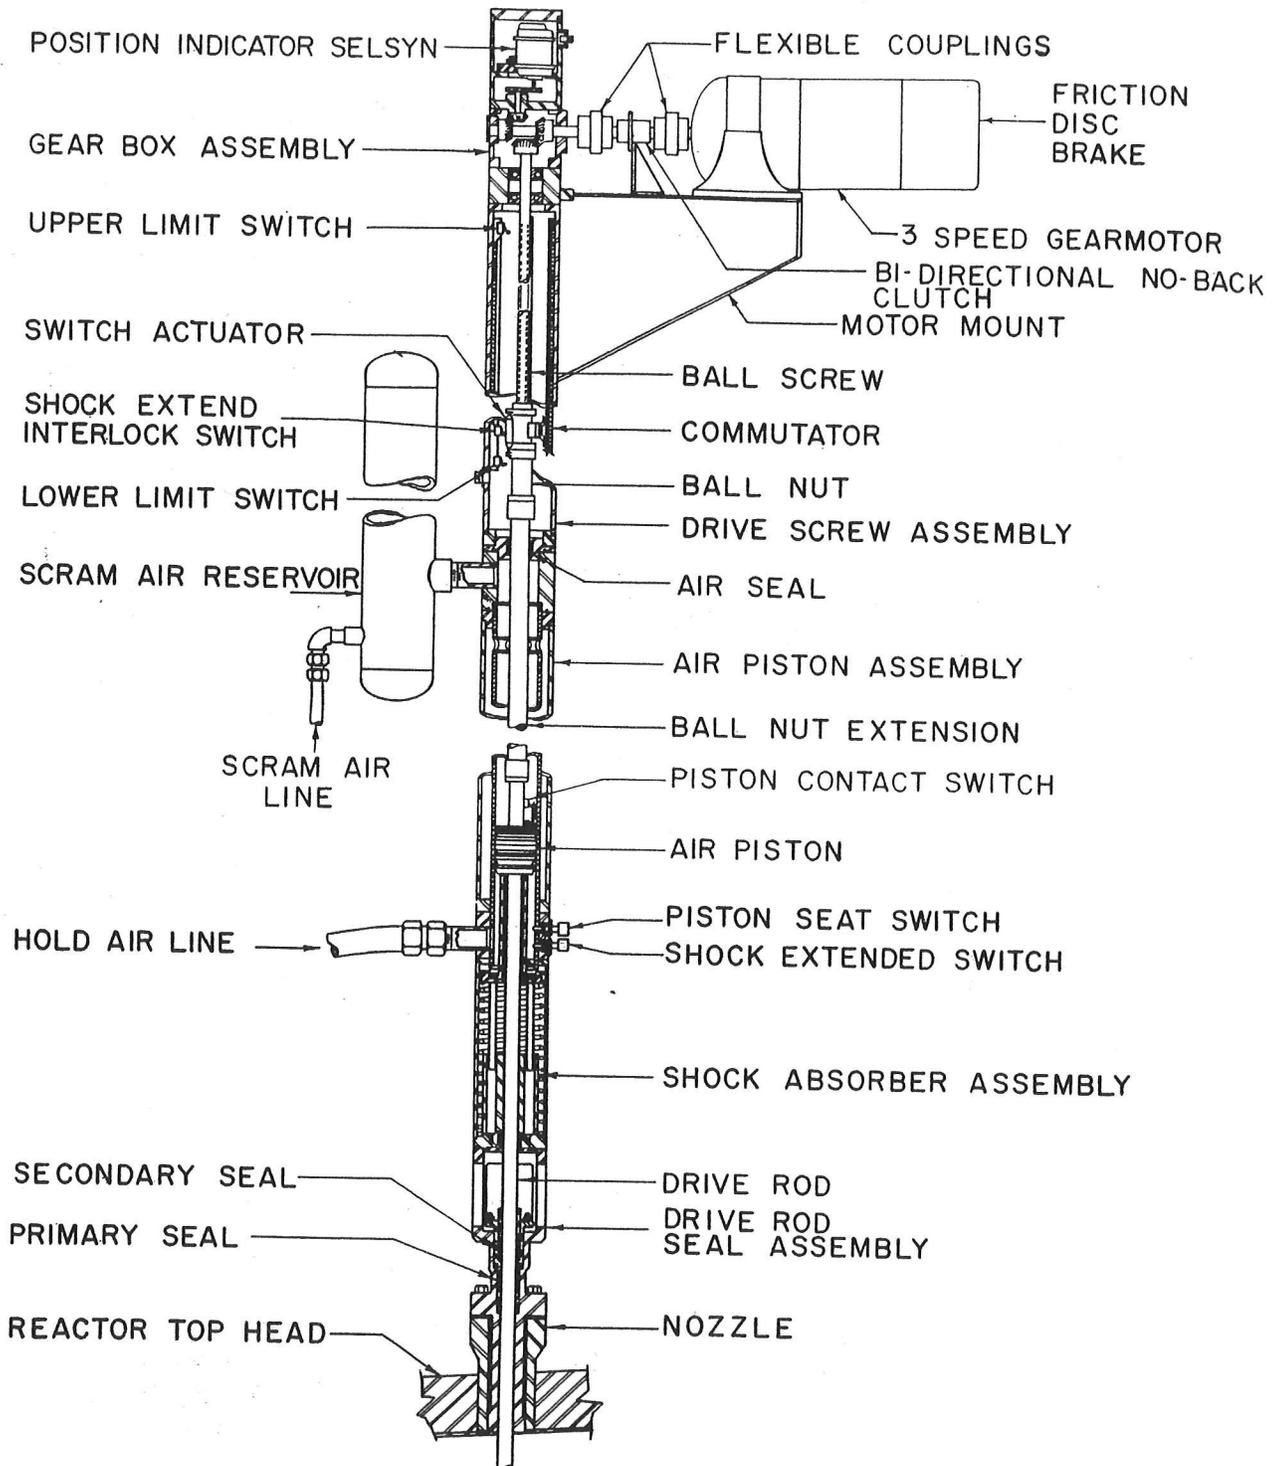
Schematic drawing of SPERT-III control rod drive assembly. Compare with HAER Photo Nos. ID-33-I-52 and -53, which show air pistons and three-speed drive motors atop the reactor.
